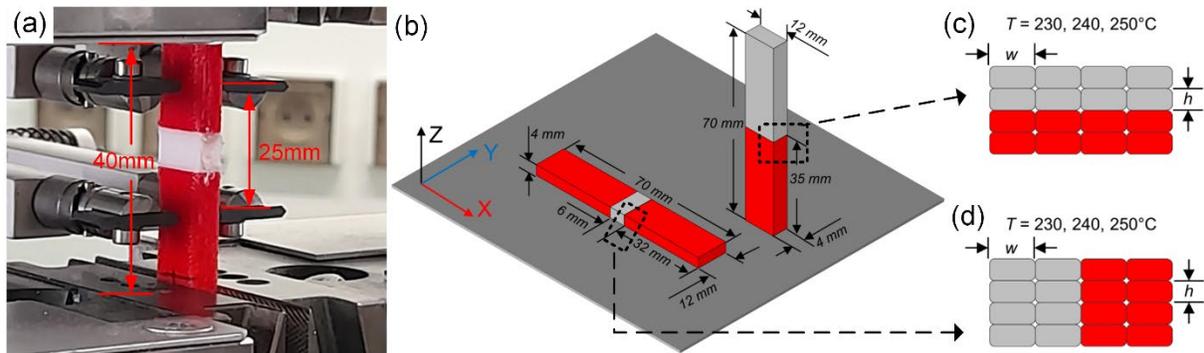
Fabrication and butt-joint tensile test of specimens. (a) Tensile test machine; (b) Geometries of specimen; (c) Interface of vertically printed specimen; (d) Interface of horizontally printed specimen
